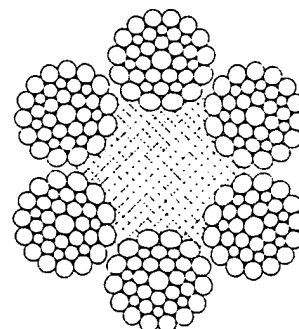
Rope cross section 6x36 Warrington-Seale + fiber core
